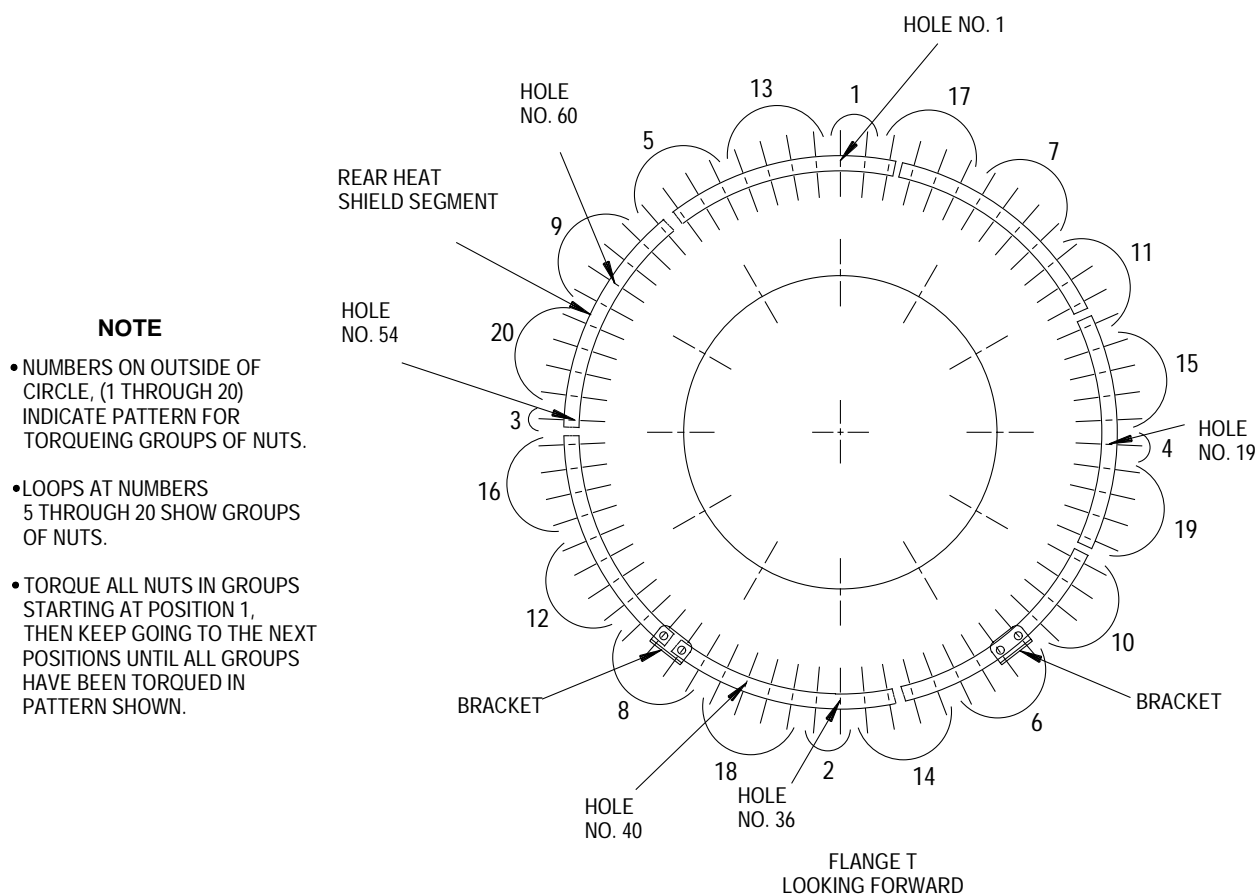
Flange T Bracket Locations and Bolt Torquing Sequence
